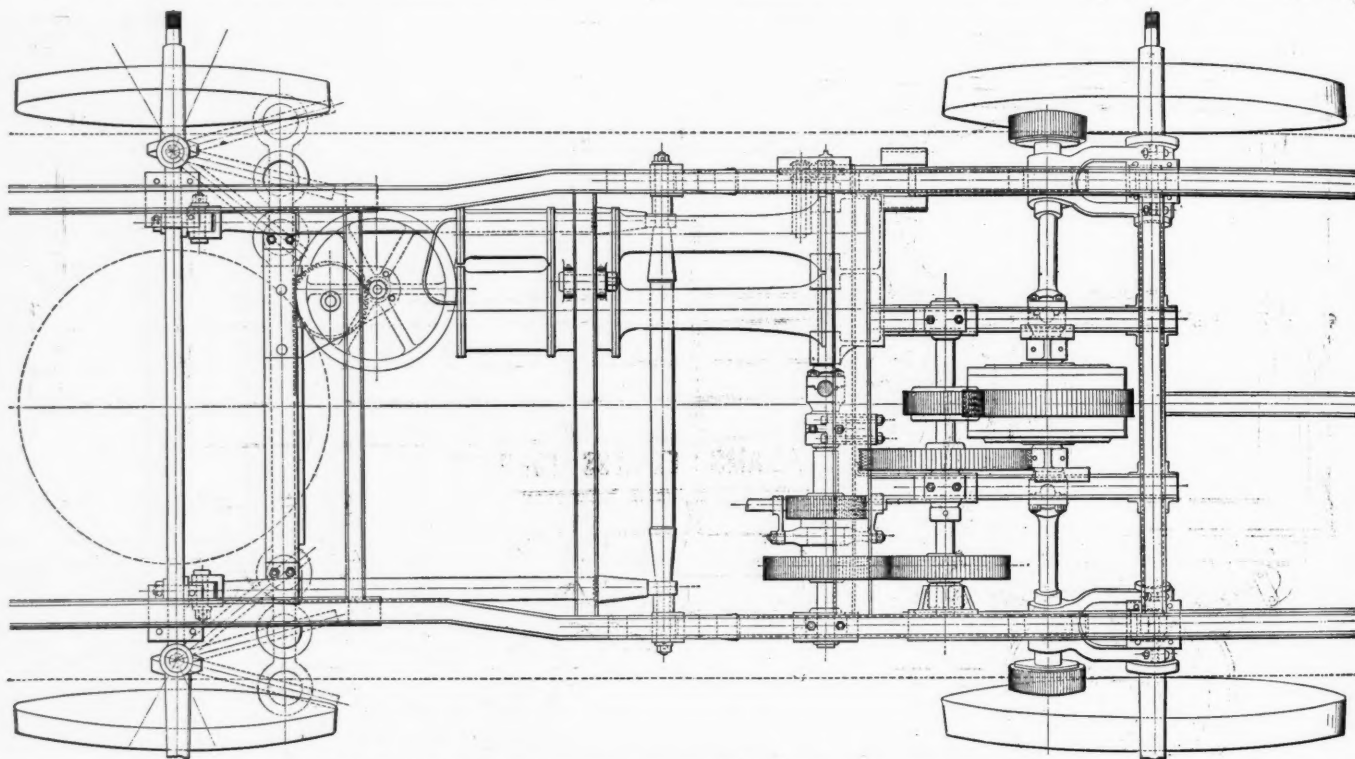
Plan of Heavy Automobile showing Driving Gear and Steering Mechanism.
